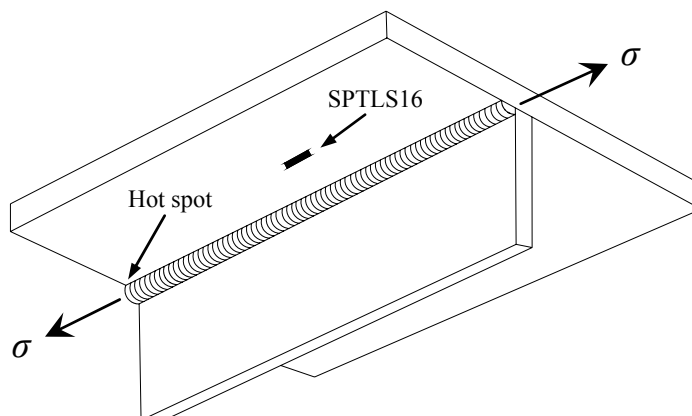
Weld stress analysis of welded joint at strain gauge SPTLS16
